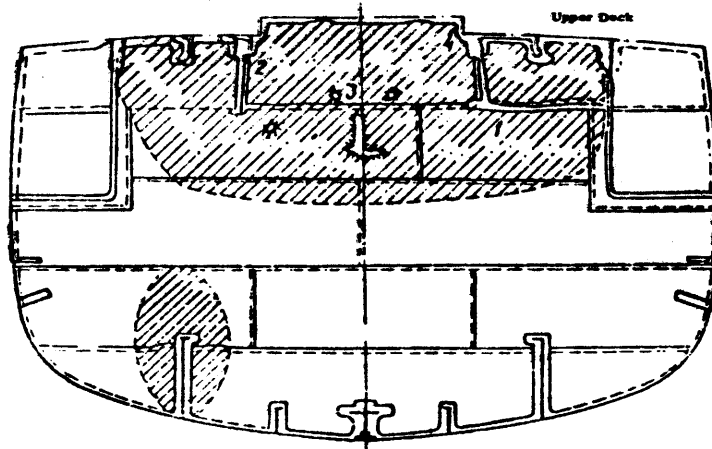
HUNTER. Welded Bulkhead at Frame 74. Seriously Deformed Section Cross Hatched (Seen from Bow)
